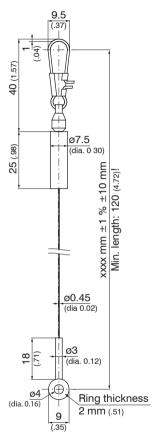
Wire extension WE-xxxx-CLIP, dimensions in mm (inches), not to scale
